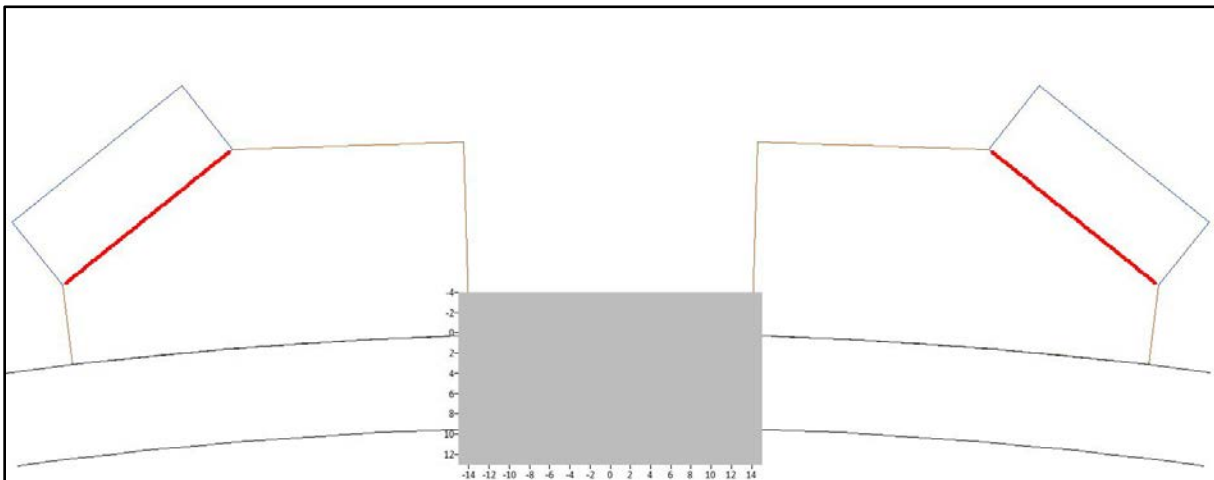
Measurement setup for weld inspection showing the position of the probes with respect to the weld and the selected region of interest (gray rectangle)
